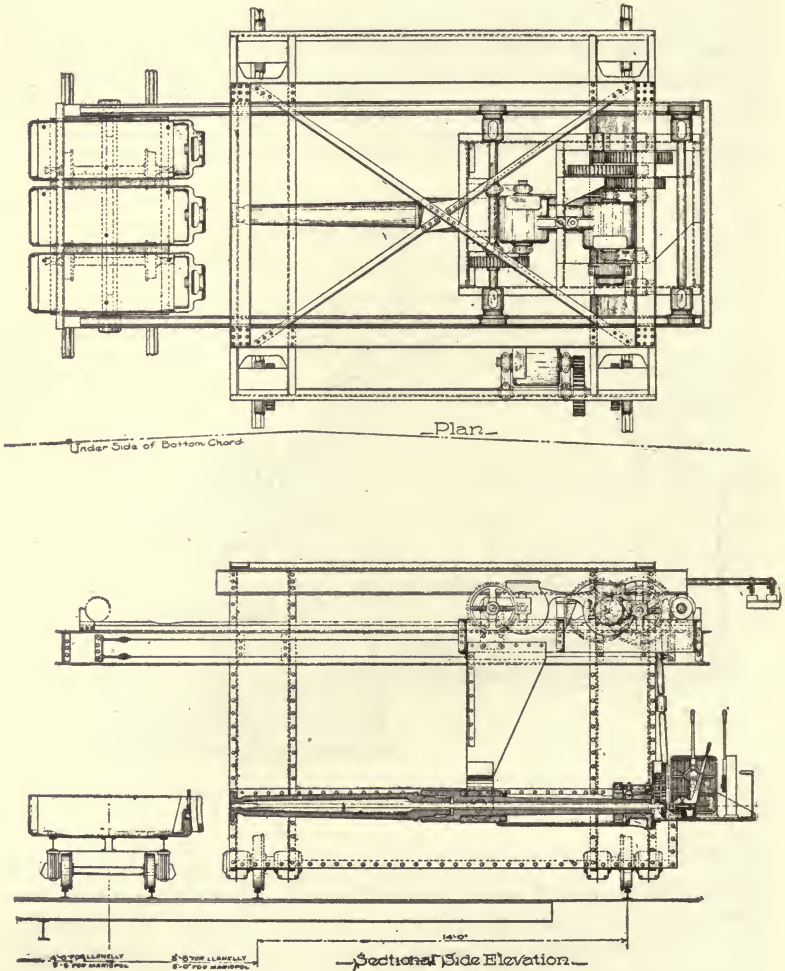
FIG. VIII-I.—WELLMAN CHARGING MACHINE.
